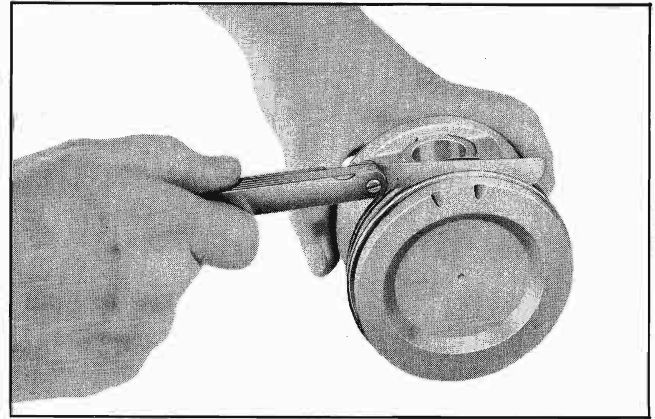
Measuring Side Clearance of Ring in Groove
